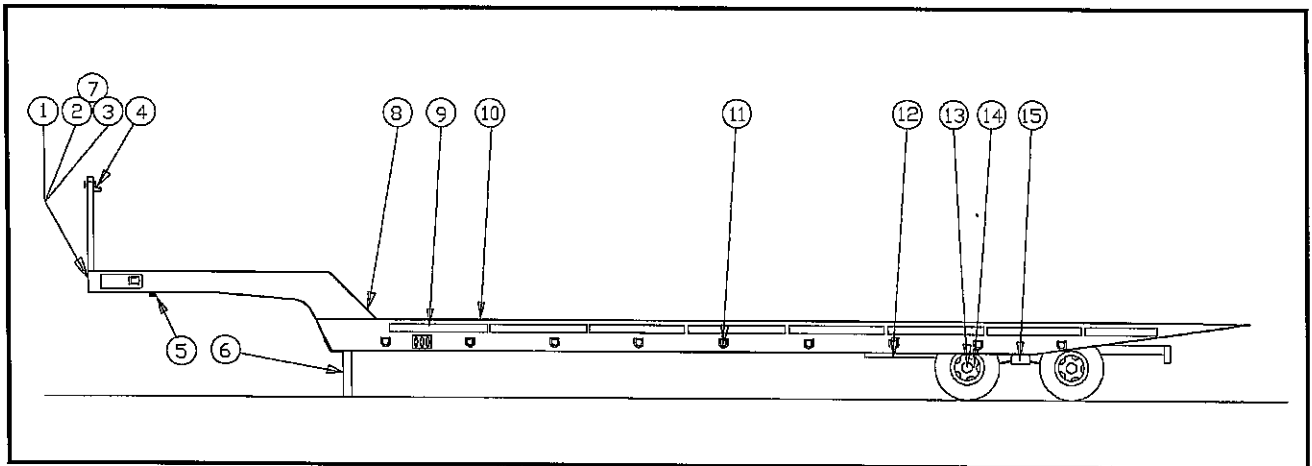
SEMITRAILER MAIN COMPONENTS
